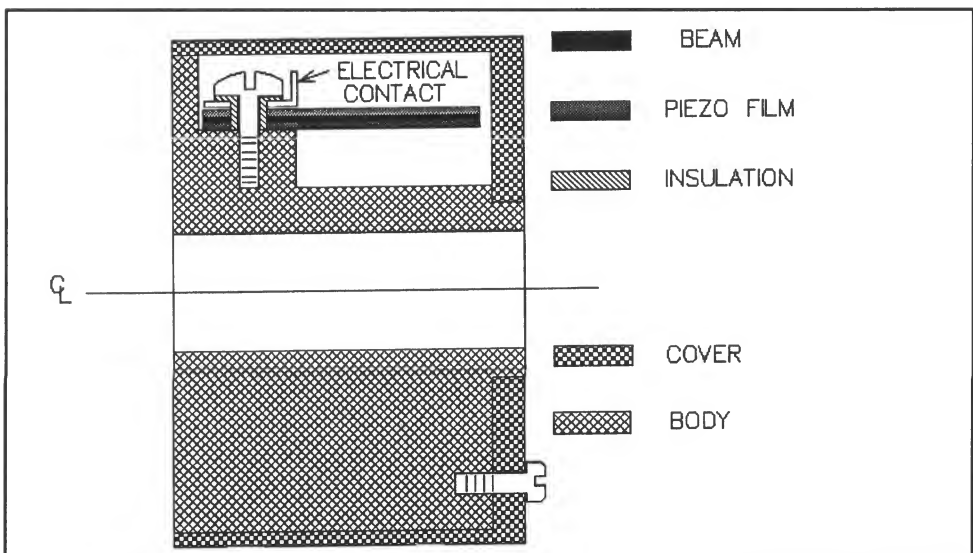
Cross-section drawing of the muzzle accelerometer.
